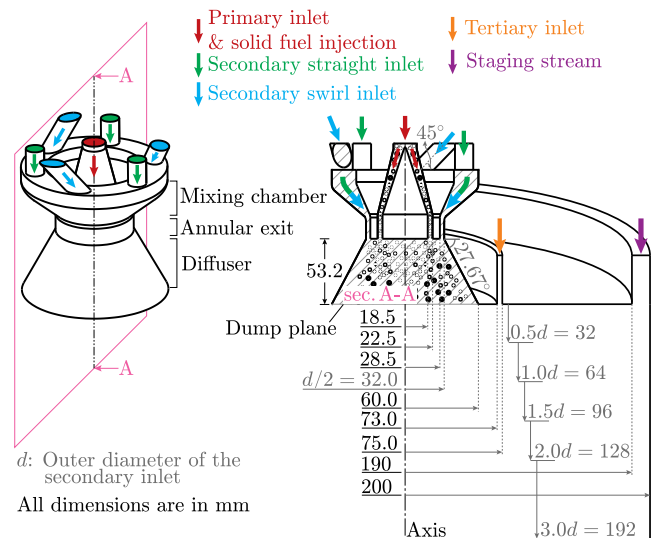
(left) Burner head with primary and secondary inlets; and (right) cross-sectional view of the inlets supplemented by the dimensions of the burner and combustion chamber. The primary inlet is an annular tube. The secondary inlet consists of 3 straight and 3 tilted inlets followed by a small mixing chamber. The inlets are discharged into this mixing chamber, after which the mixed secondary flow enters the chamber through the diffuser. The exemplary axial levels specified by d below the dump plane are the levels for which measurement data on axial and tangential particle velocity components are available. Other measurement levels are $4.0d = 256$ mm, $5.0d = 320$ mm, and $6.0d = 384$ mm. For particle temperature, the measurement levels are 100 mm = $1.5625d$, 200 mm = $3.125d$, and 300 mm = $4.6875d$. (For interpretation of the references to colour in this figure legend, the reader is referred to the web version of this article.)
